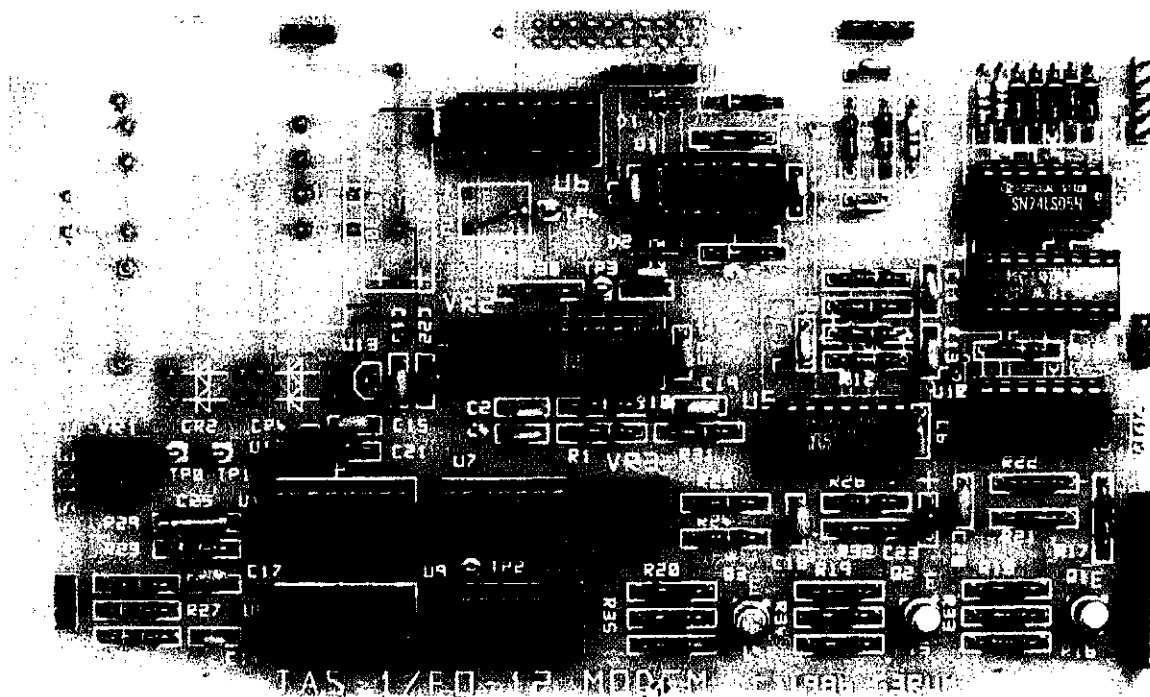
Photo D. Completed circuit board. AC power supply components have been omitted; link LKC is shown for a TAPR TNC-2.
